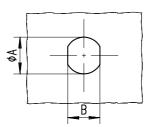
Measurement Drawing—Interface Cable KA41, Prop. 1
